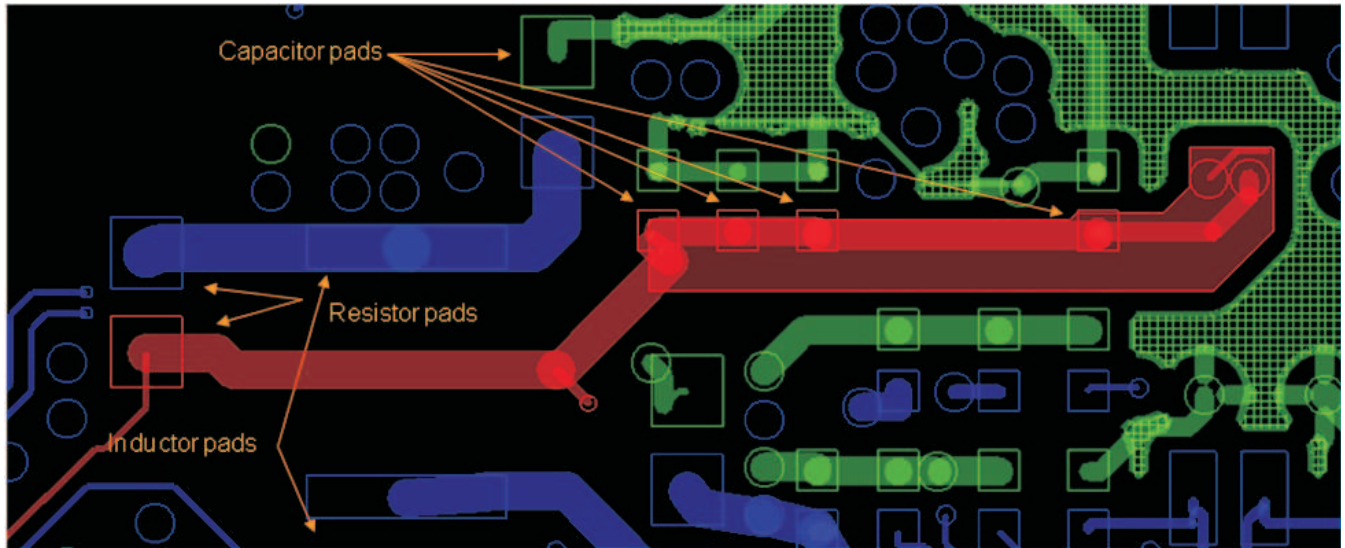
Layer PCB With Plated Through Holes (PTH) Vias
